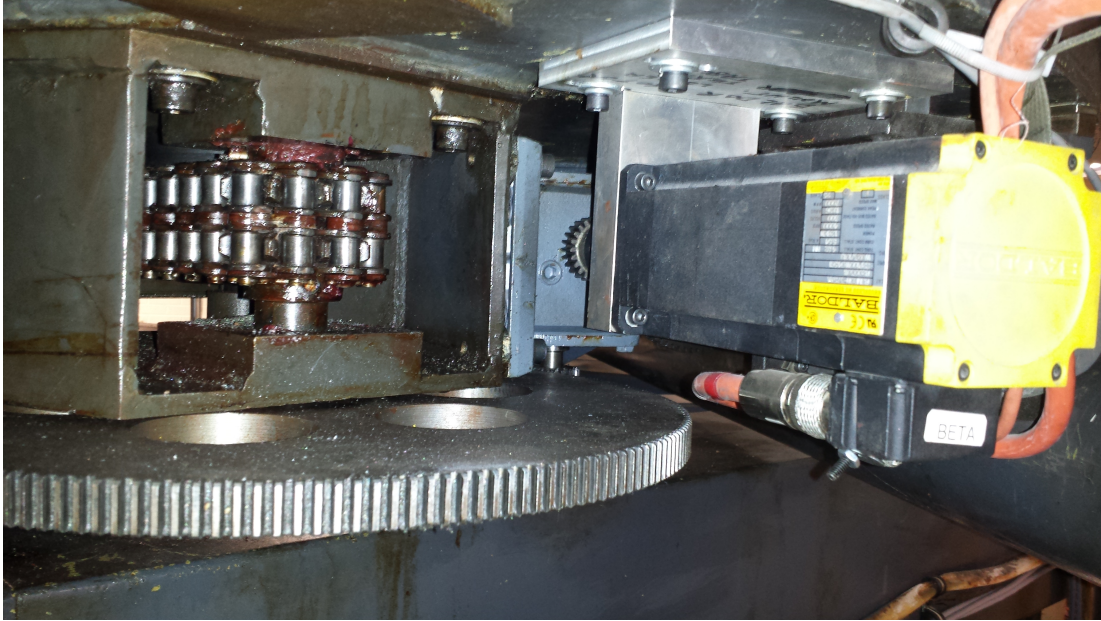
Servomotor Assembly that Drives the Lower Turntable
